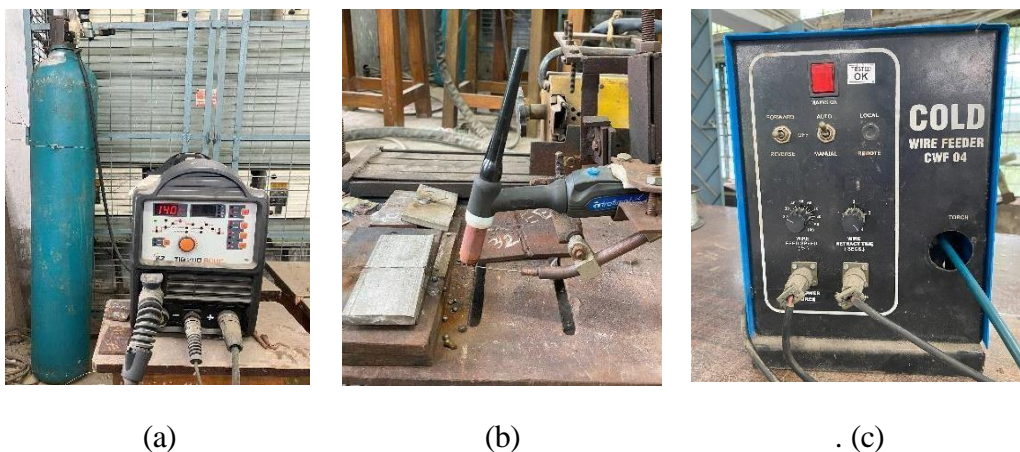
(a) GTAW Machine used, (b) Torch set at 75°, (c) MOGRA CWF 04 Cold Wire Feeder used
